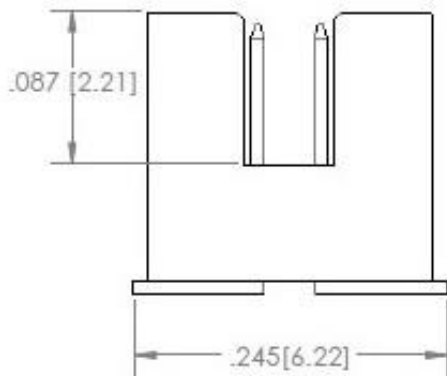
shows the physical dimensions of the pin header with dimensions given in inches and millimeters.
